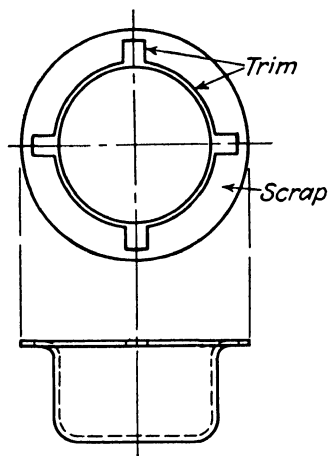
First operation flanged shell showing the initial trimming cut in the flange around the mouth.
